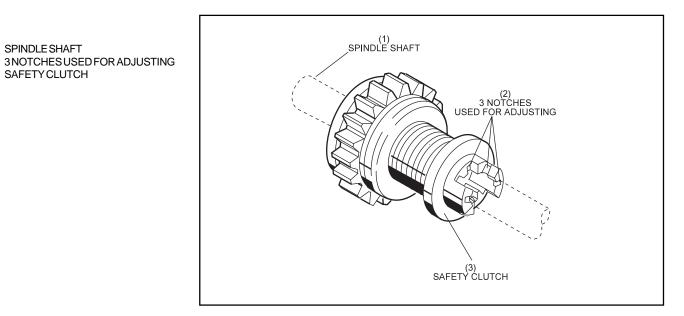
Spotting Tong Spindle Shaft Clutch.
